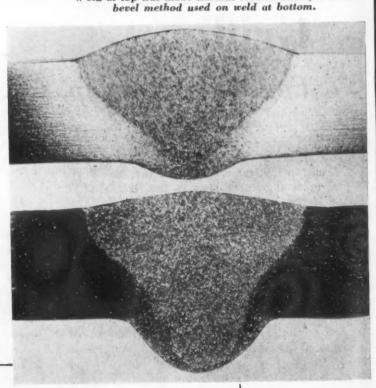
Macrographs (10-times enlargement) of helium-shielded arc welds on light-gage magnesium. Weld at top was made without reverse bevel; reverse
